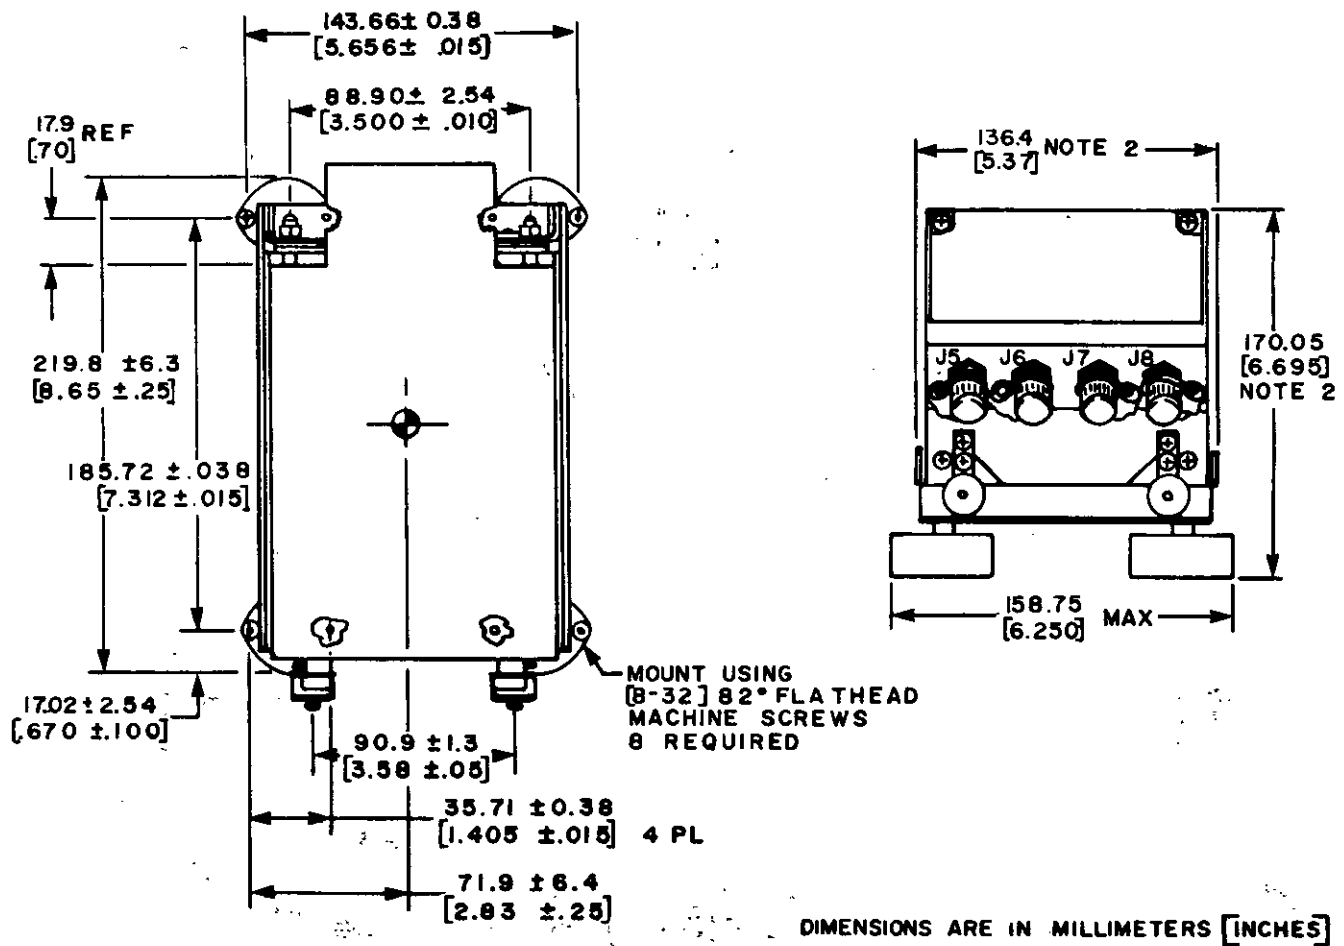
Electronic Equipment Mounting Base MT-4935/ARC and Radio Receiver-Transmitter Rt-1250A/ARC, outline and mounting dimensions
